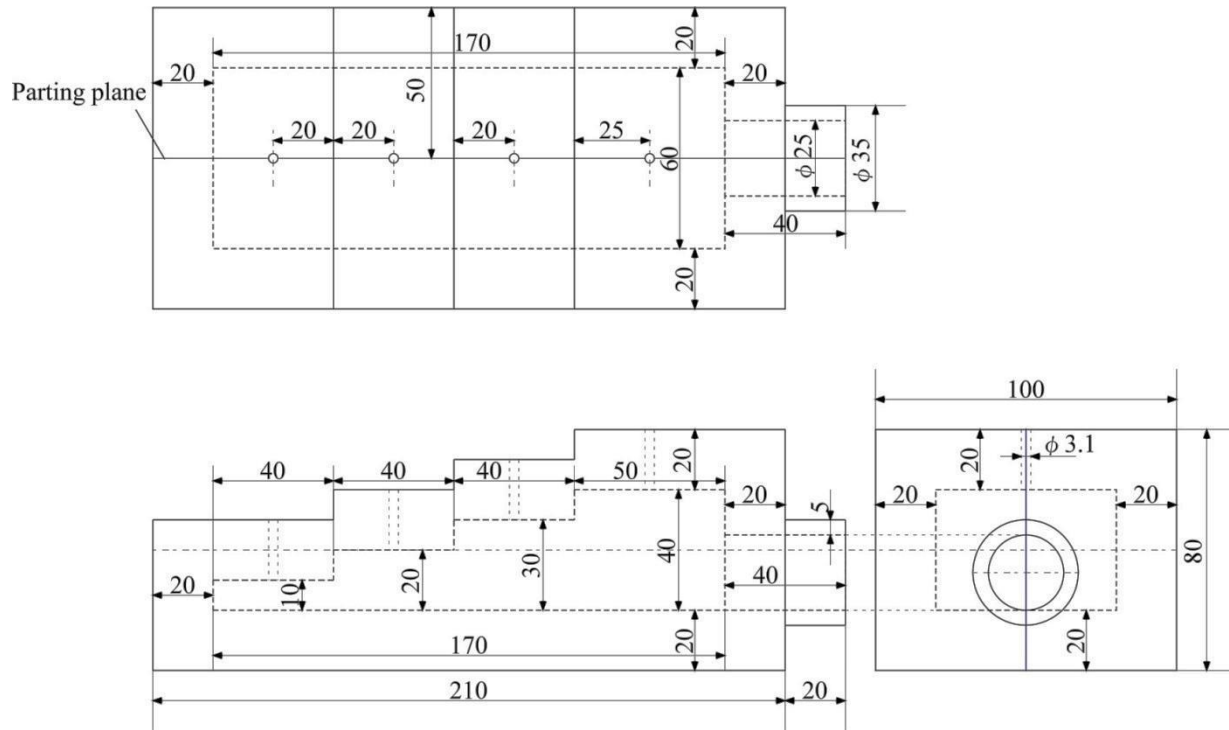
Shape and size of permanent mold for stepped test piece.
